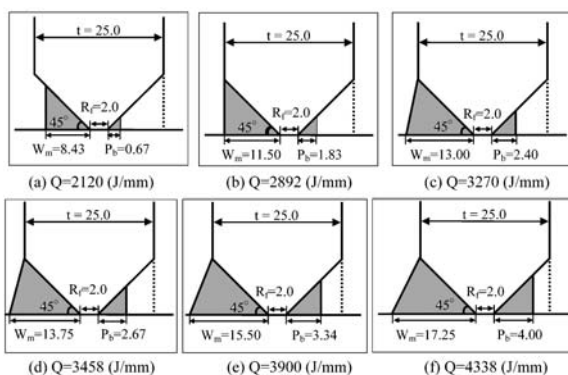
Schematic illustration of weldmetal and penetration bead.
